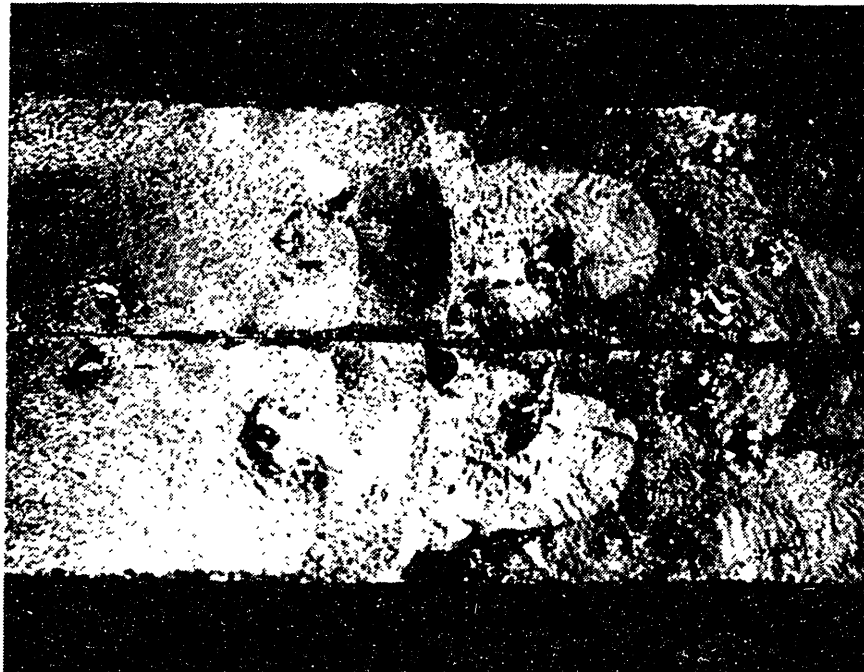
Fracture surface of LB weld at 5X, showing pores on the surface.
